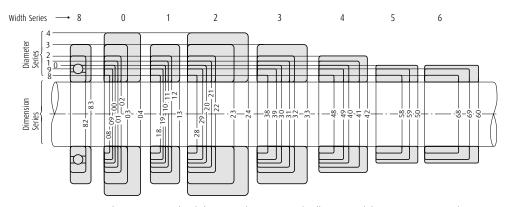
Comparison of Cross Sections of Radial Bearings (except Tapered Roller Bearings) for various Dimensional Series
